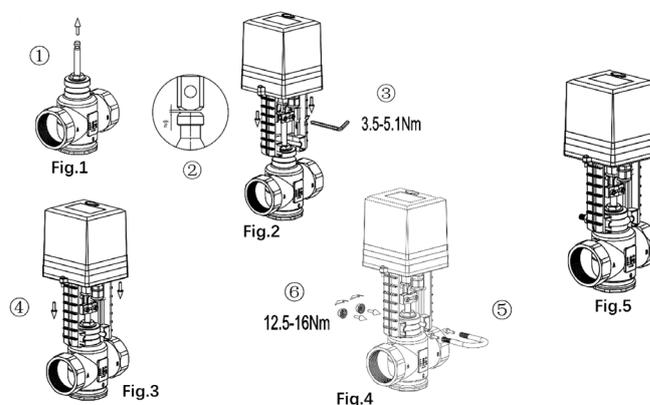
Using a suitable tool (pliers or a wrench), pull the valve stem out of the valve body to its highest position (1).
